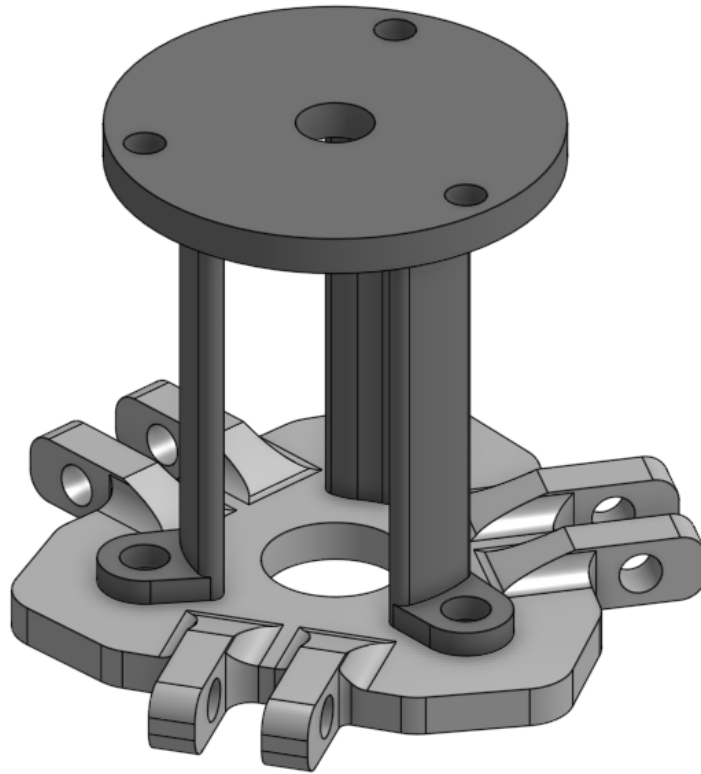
Lead screw retention shroud CAD model attached to wheel segment base plate
